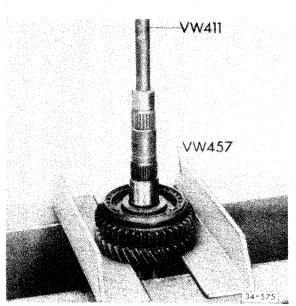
Synchronizer sleeve/hub and 1st gear, removing
